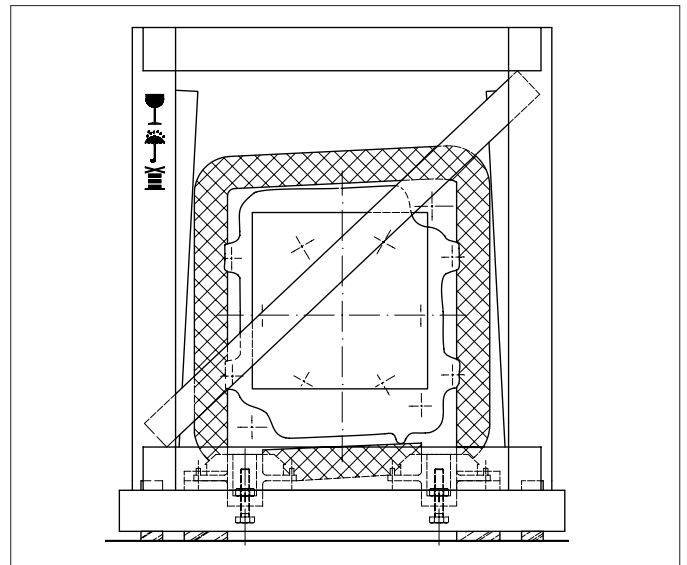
The boiler completely assembled in a crate and on a pallet.
